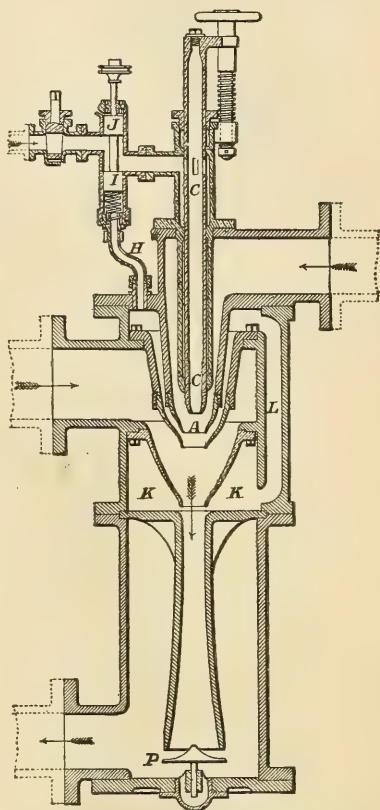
Condenser with Self-adjusting Jet of Steam.
